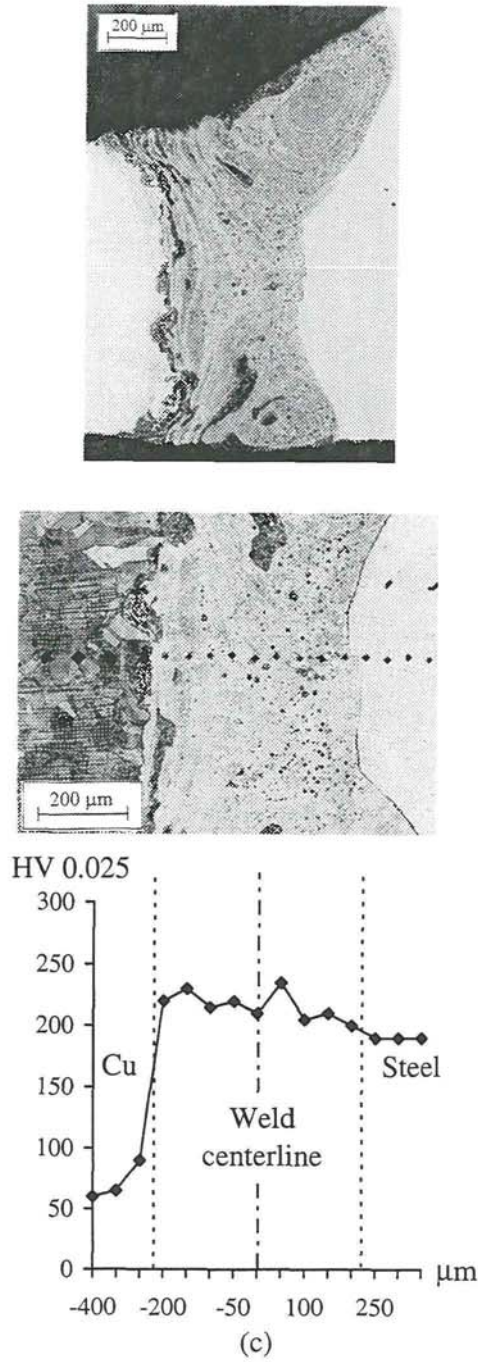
(c). Weld cross sections and hardness profile using argon as shielding gas.
